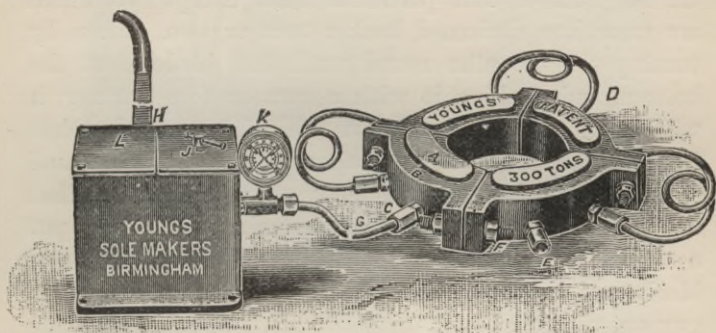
Youngs' Hydraulic Propeller Starter.
